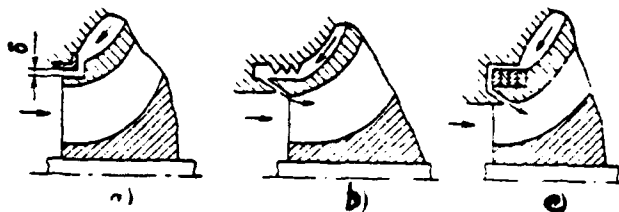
Packings/seals of the impeller: a) slot; b) labyrinth; c) floating.
